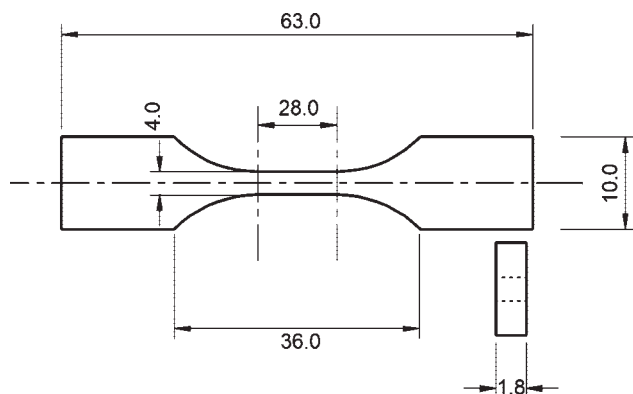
Dumbbell-shaped specimen for SFFT (dimensions in mm).
